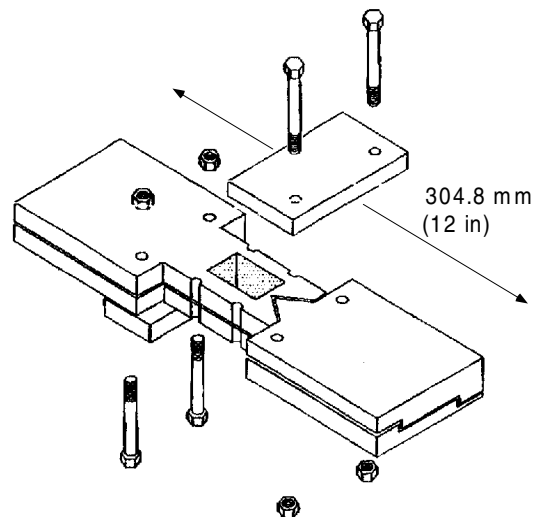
SACMA SRM 3R-94 OHC Test Fixture.
